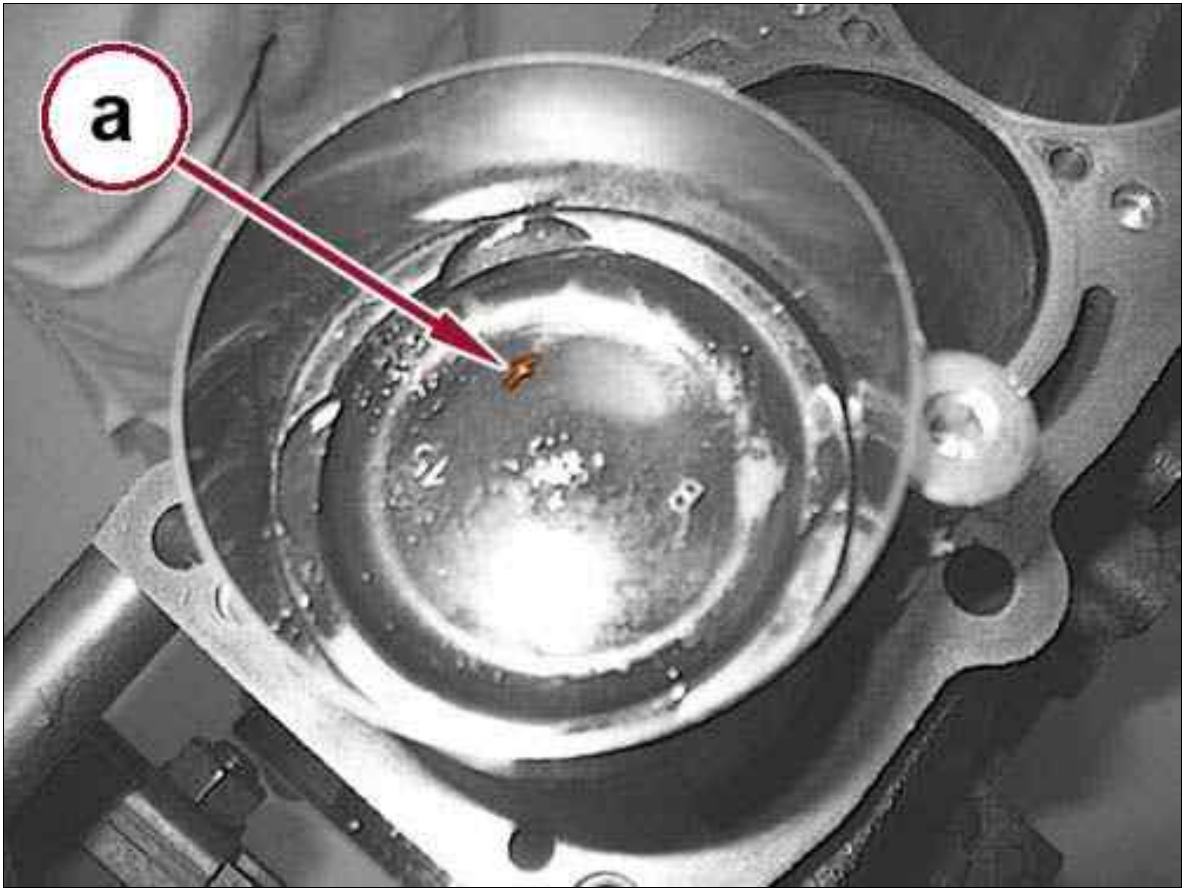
Using A Ring Compressor To Install Rod & Piston With Bearing Shell
